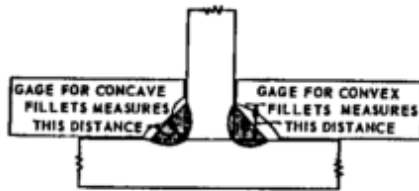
Two types of fillet weld gages. Convex fillets may be measured with gage of type shown on the right; in this case it measures the leg size. Concave fillets are measured with a gage like the one on the left; in this case it measures the weld throat.
